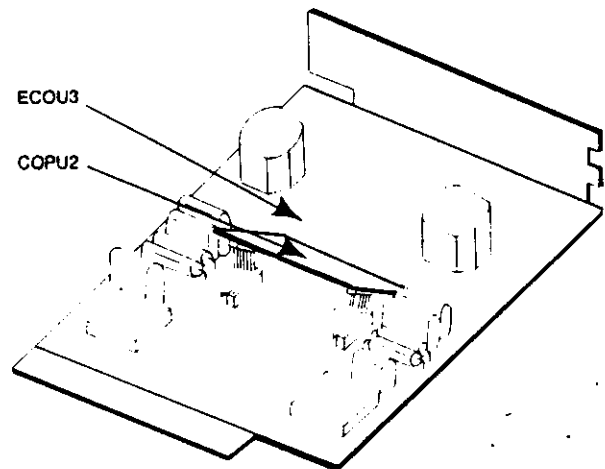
MOUNTING THE COPU PCB ON THE ECOU PCB
